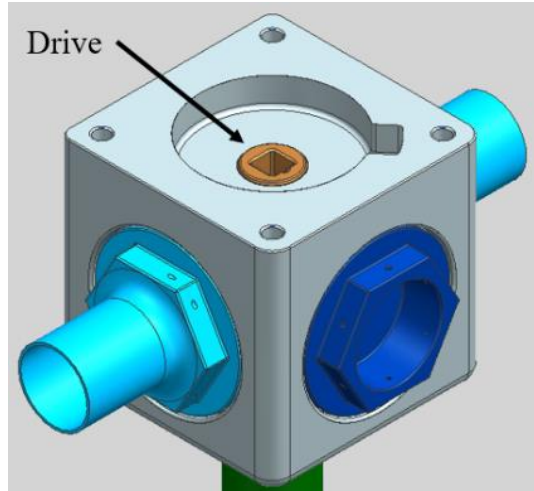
TWPCV with actuator package removed to expose the drive interface.
